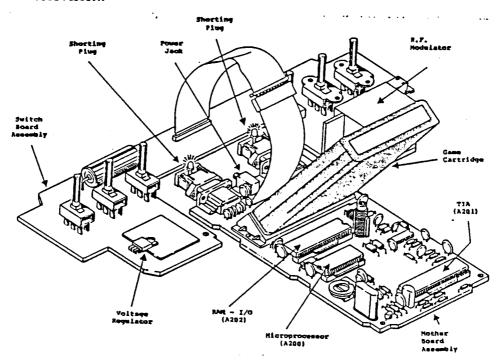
2600 Switchboard and Motherboard Assembly
